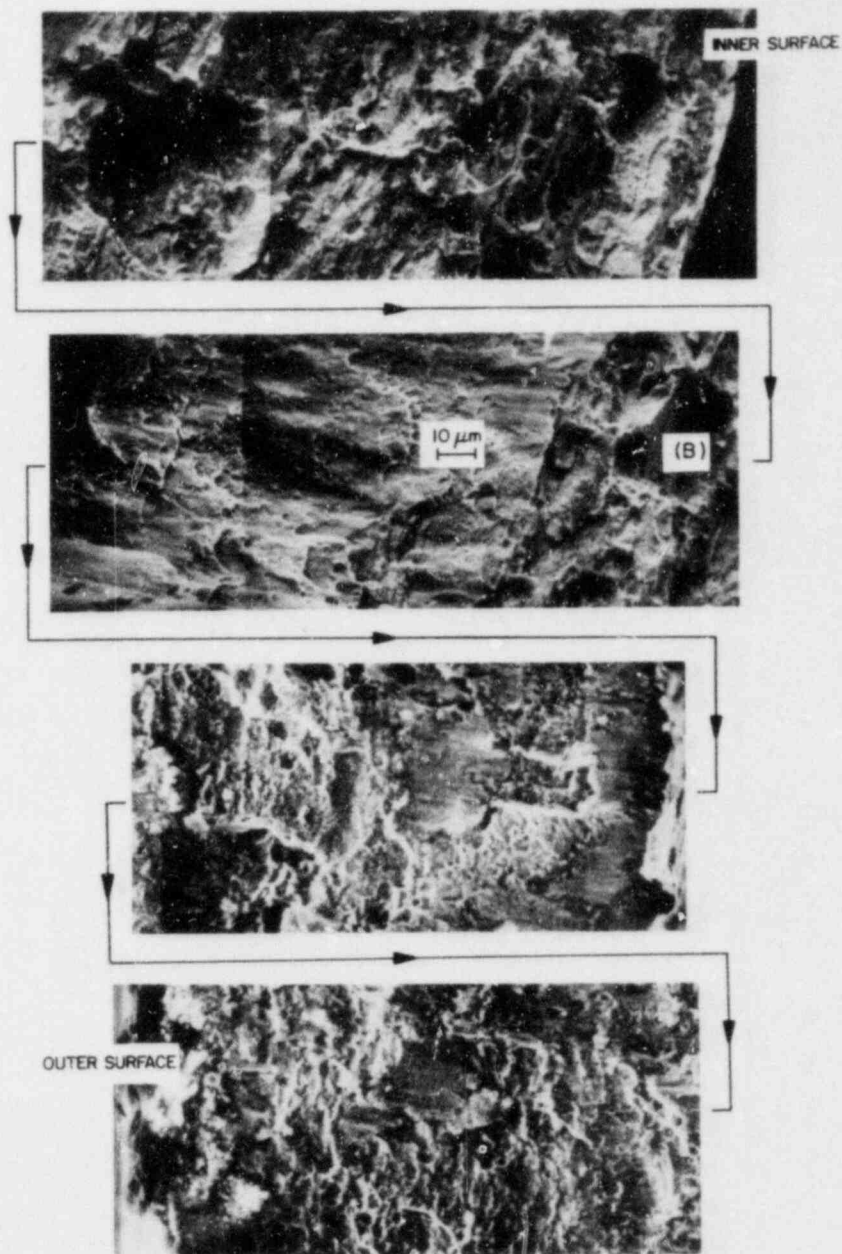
Fracture Surface Morphology Similar to Fig. 3.4(B) away from the Expanding Ring.
